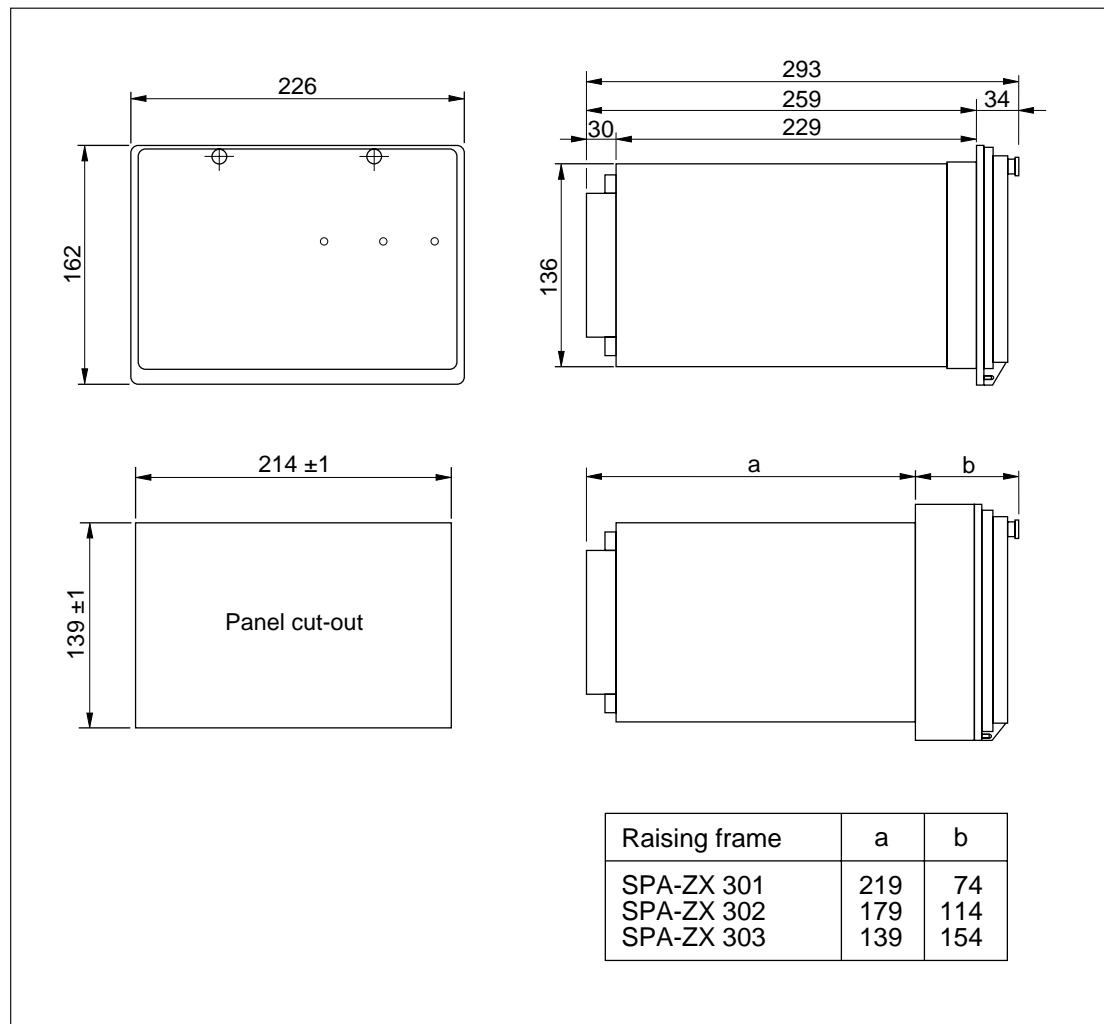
Dimension and mounting drawings for feeder protection relay SPAA 345 C.
